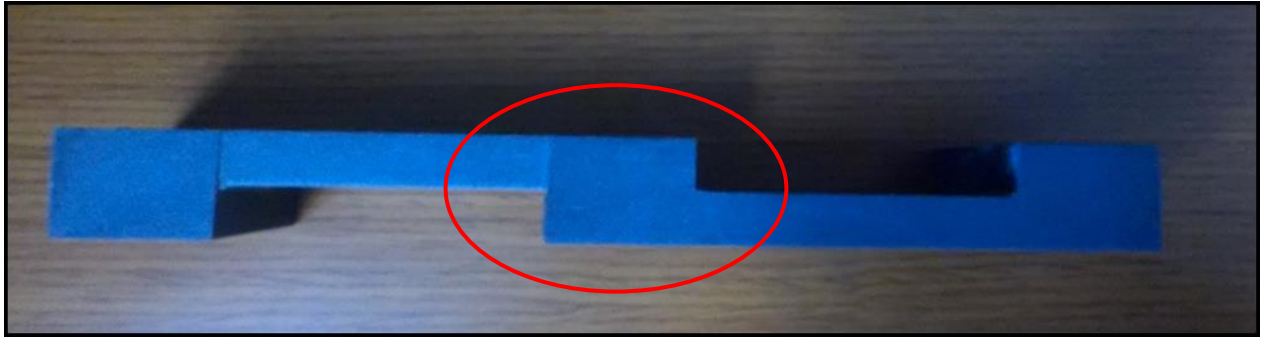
Side View of a Secondary Bonded Test Specimen – Highlighted Bond Area
